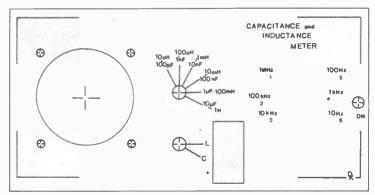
Suggested front panel layout and lettering (half-size). This can be enlarged, copied and used as a template.
